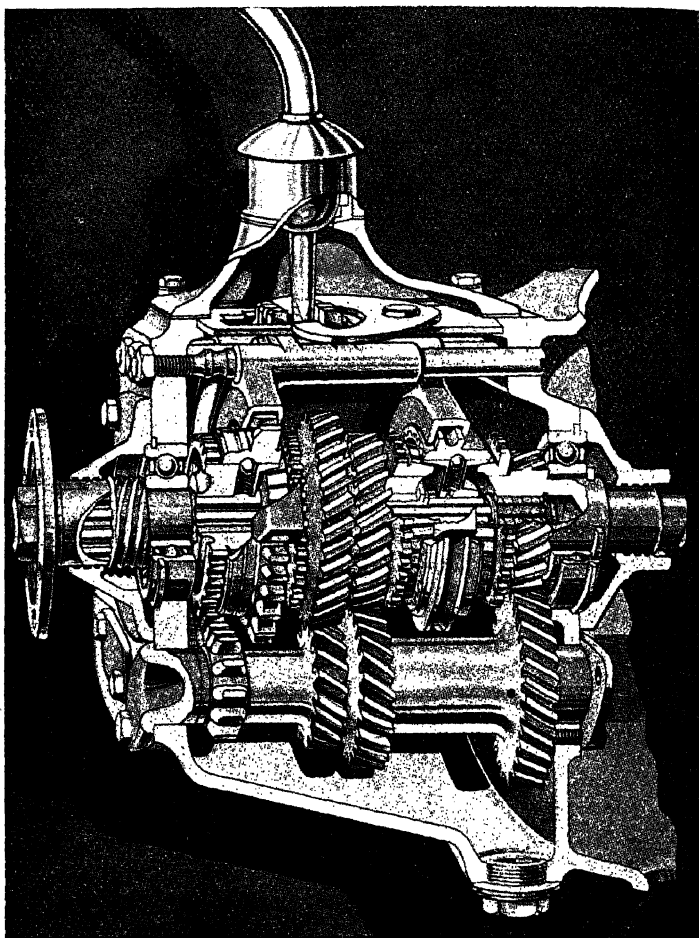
The Austin 10 H.P. Four-Speed Synchromesh Gearbox.
